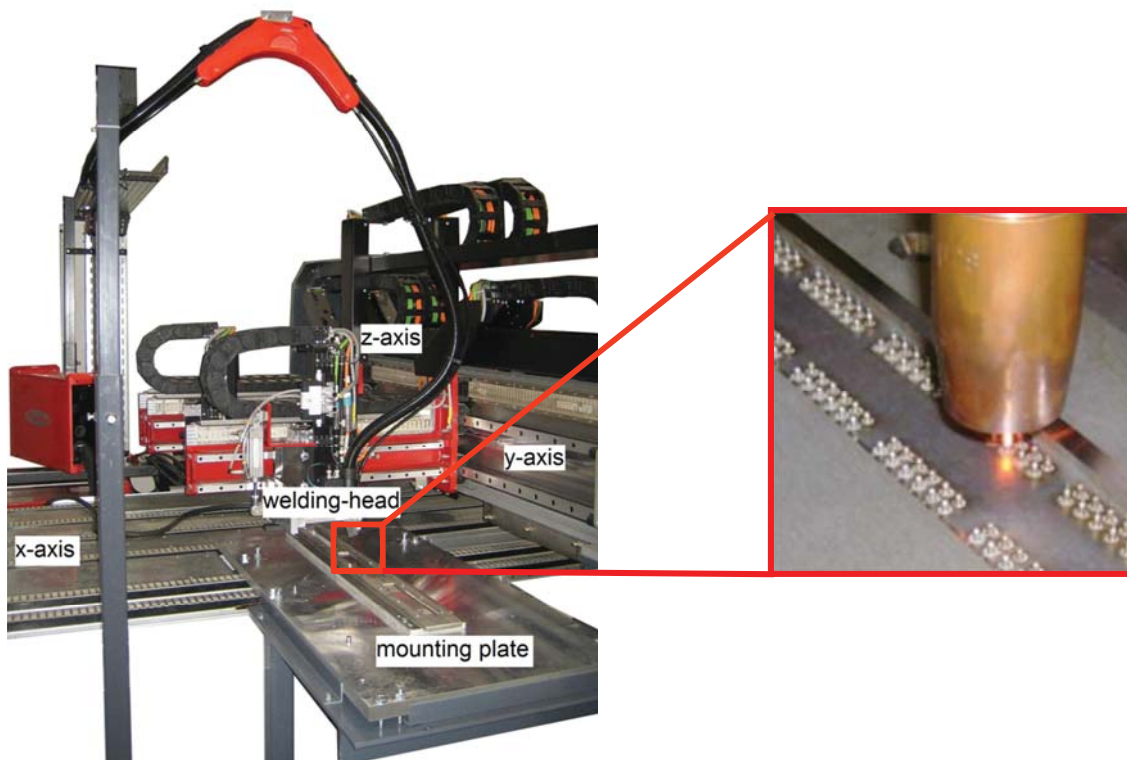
Welding of CMT pins onto thin metal sheets including a detail of the welding head during the welding process.
